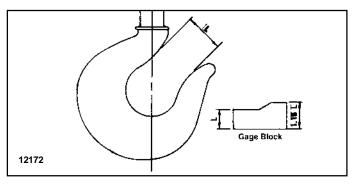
Method of Measuring Hook Throat Opening (shown with latch removed for clarity)
